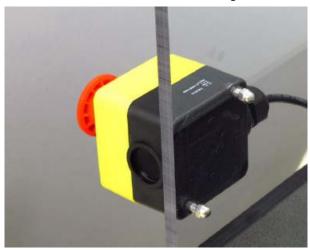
Rear View of E-Stop After Mounting (shown mounted to safety barrier so that screw locations are more visible)
